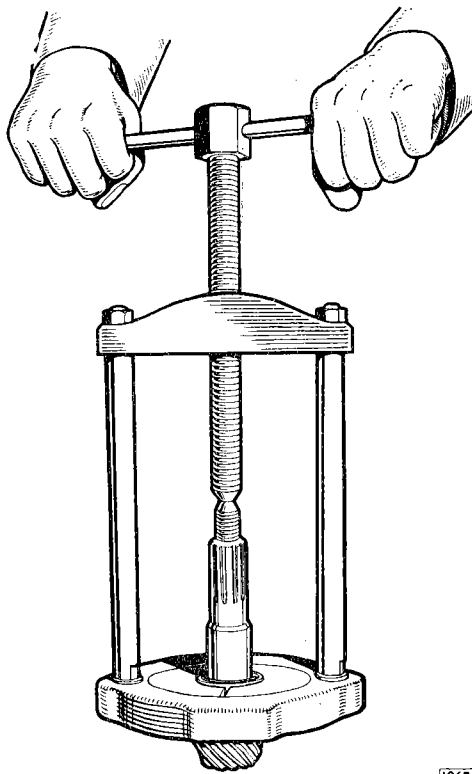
Withdraw the pinion inner bearing race using Churchill Tool No. SL.14 with adaptor SL. 14-3.
